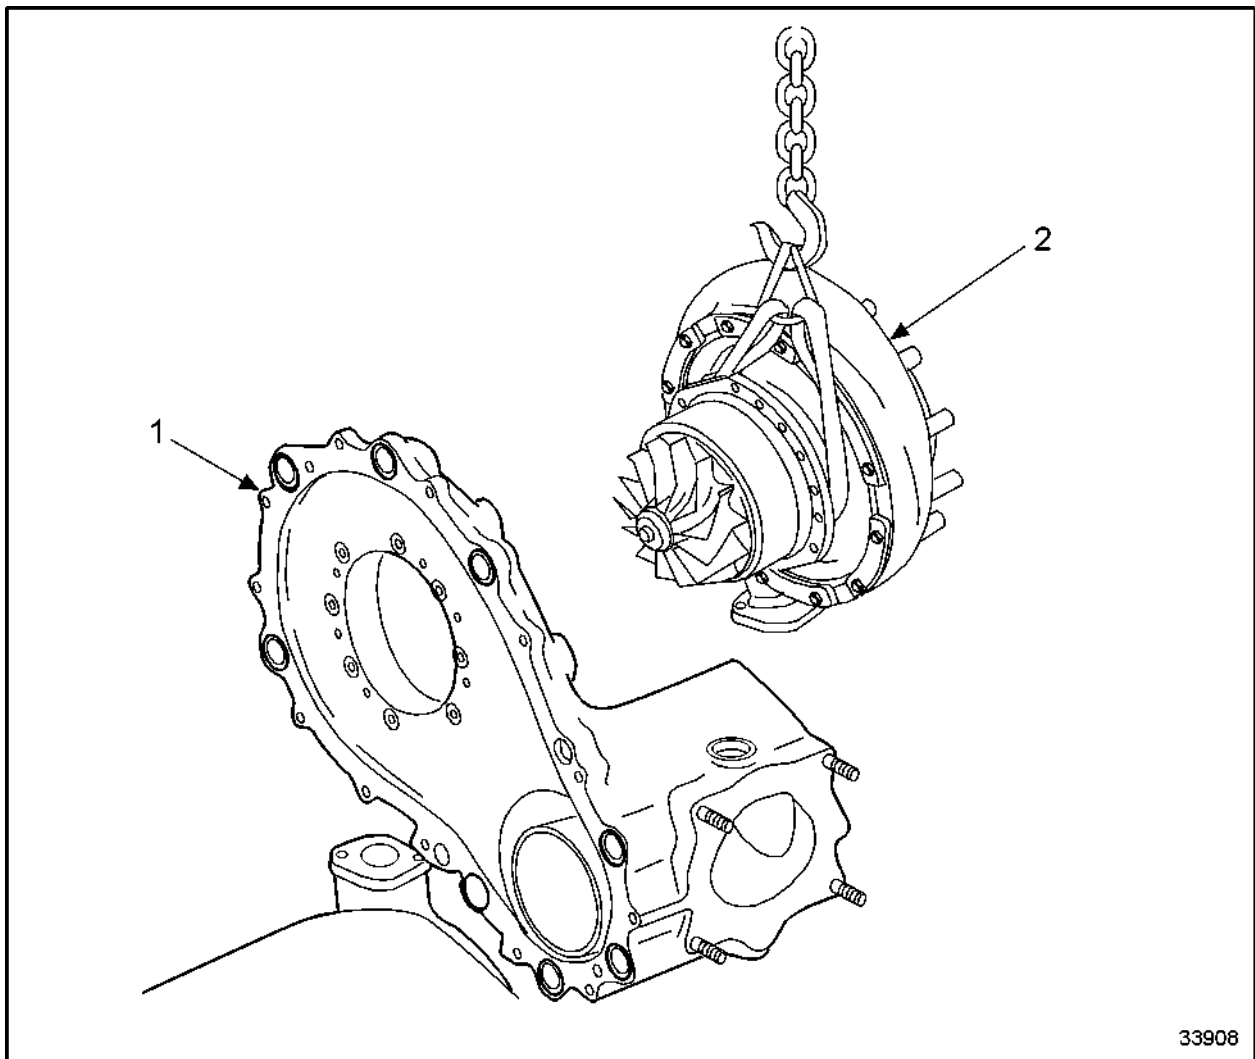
Installing Turbocharger Compressor Housing O-ring (Marine)
